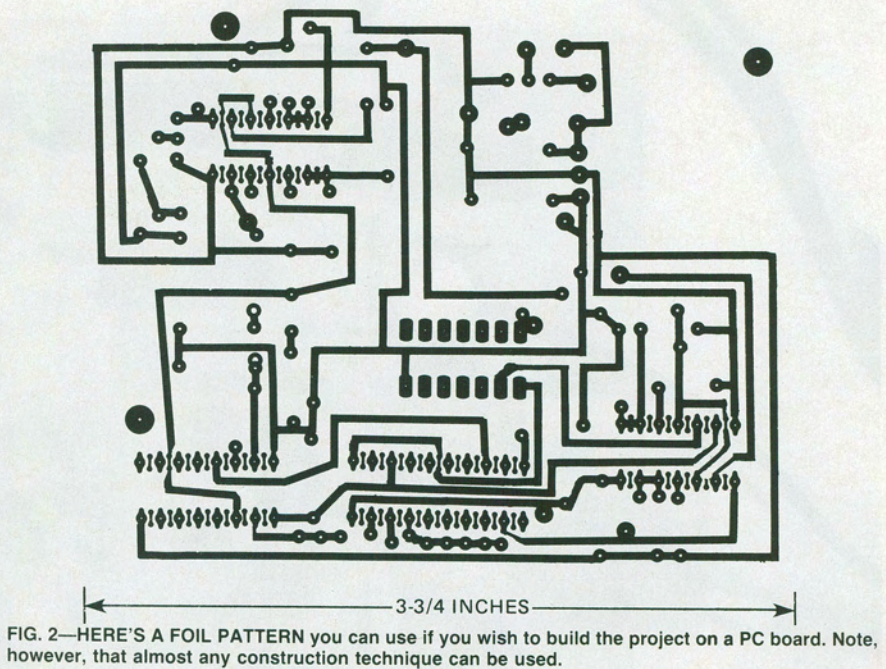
HERE'S A FOIL PATTERN you can use if you wish to build the project on a PC board. Note, however, that almost any construction technique can be used.
